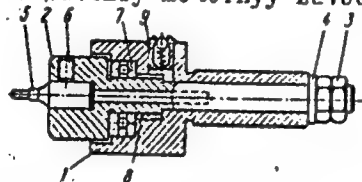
The combined method of broaching an inside hexagon: (1) holder, (2) die, (3) nuts, (4) disc, (5) die, (6) screw, (7) thrust bearing, (8) bronze bush, (9) lubricating valve.
